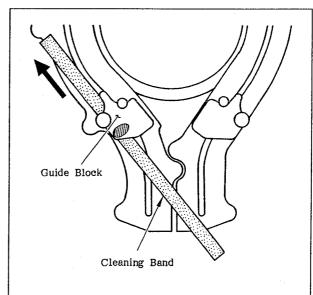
Cleaning the Slider Guide Blocks (2)
